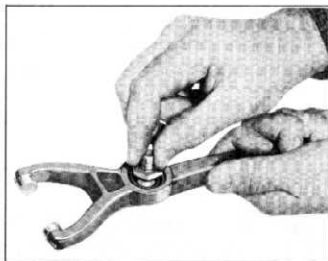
Checking Free Fit of Fork Ball in Clutch
